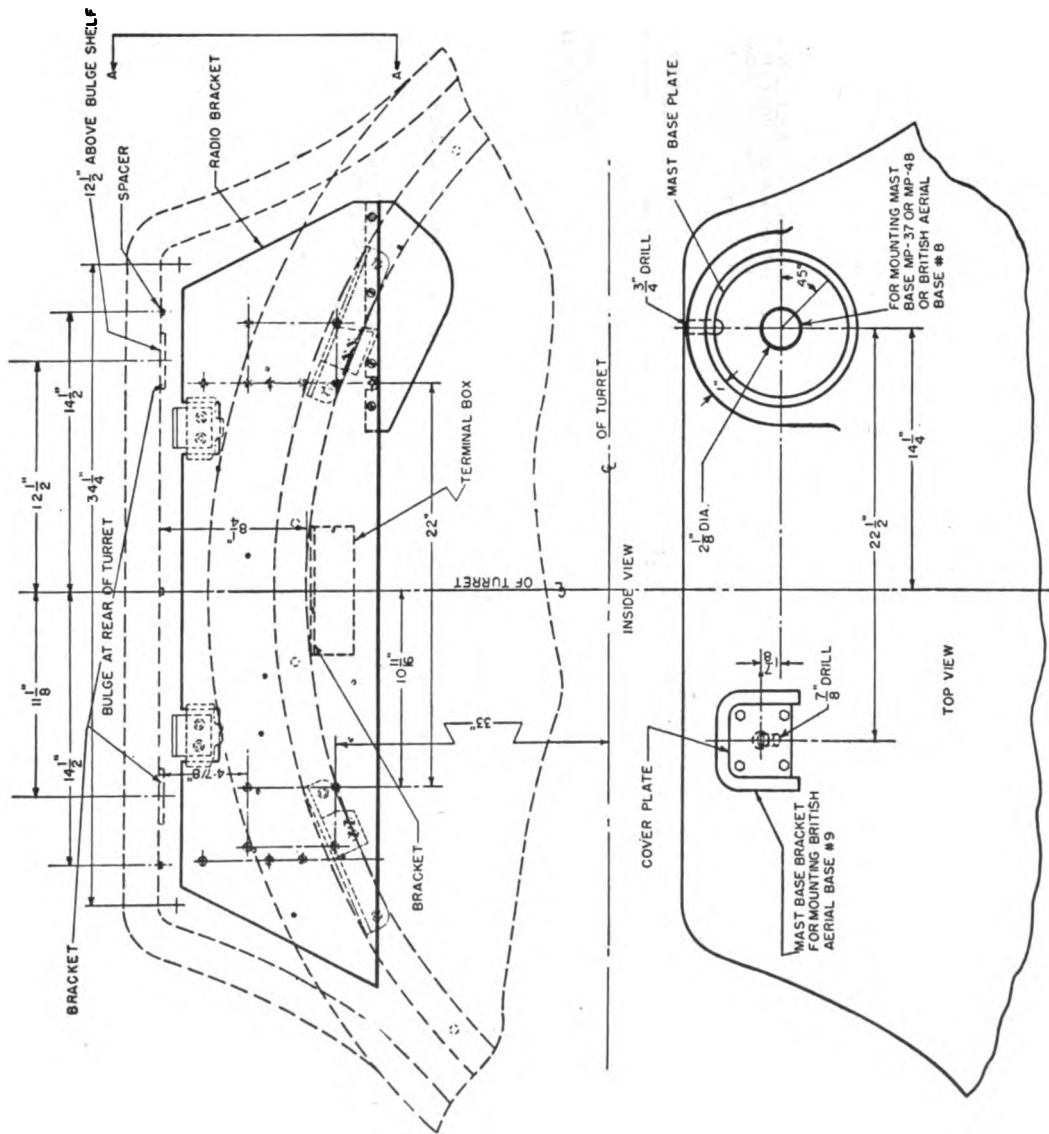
Installation of radio and interphone brackets in Medium Tank M4 series, welded hull construction.
